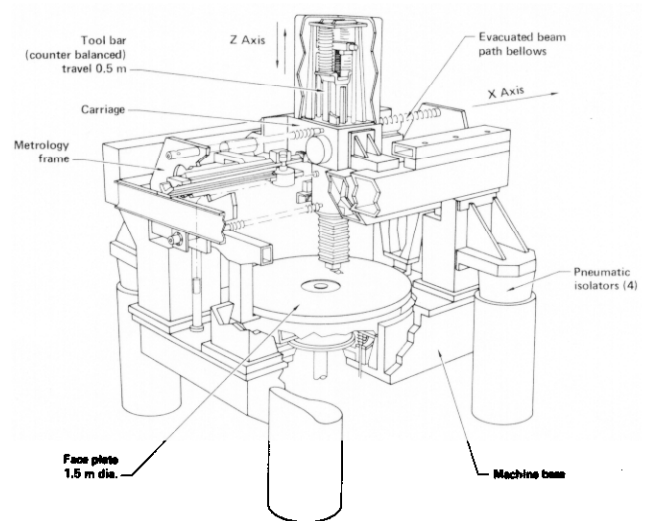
Cutaway isometric view of Large Optics Diamond Turning Machine (LODTM).
